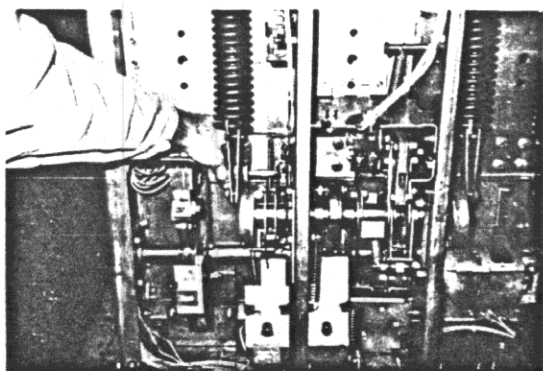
Remove E Ring Connecting Link to Switch Pin. Remove Wire Link to Operation Counter.
